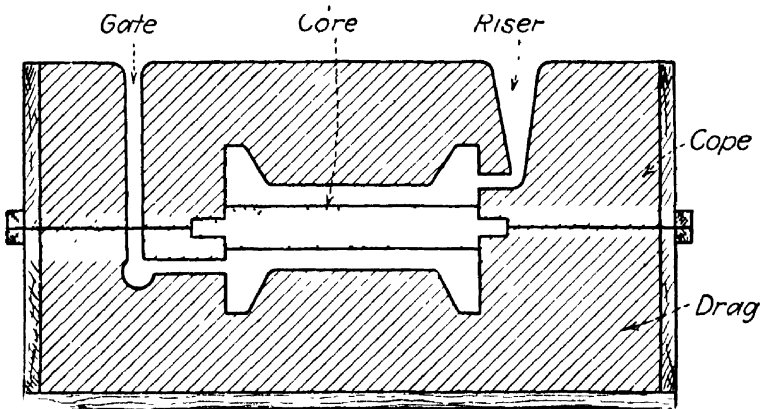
X.—Cross section of mold ready to pour. (After Rosenholtz.)
